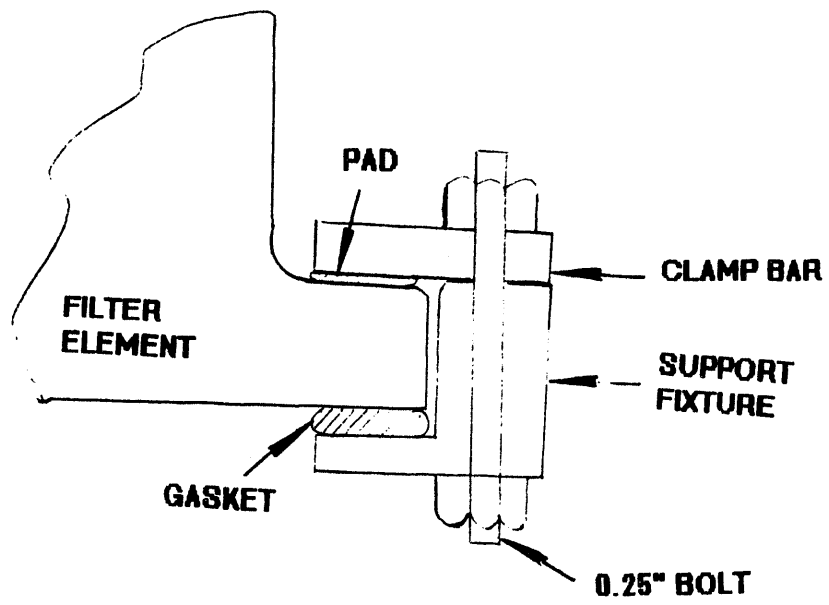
End View of an "Ideal" Assembled Filter Element
